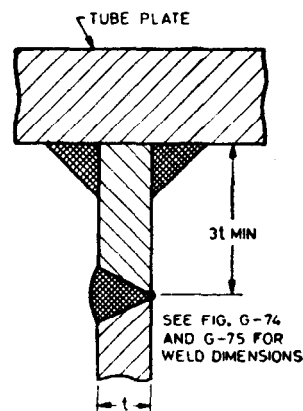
TUBE PLATE TO SHELL CONNECTIONS
